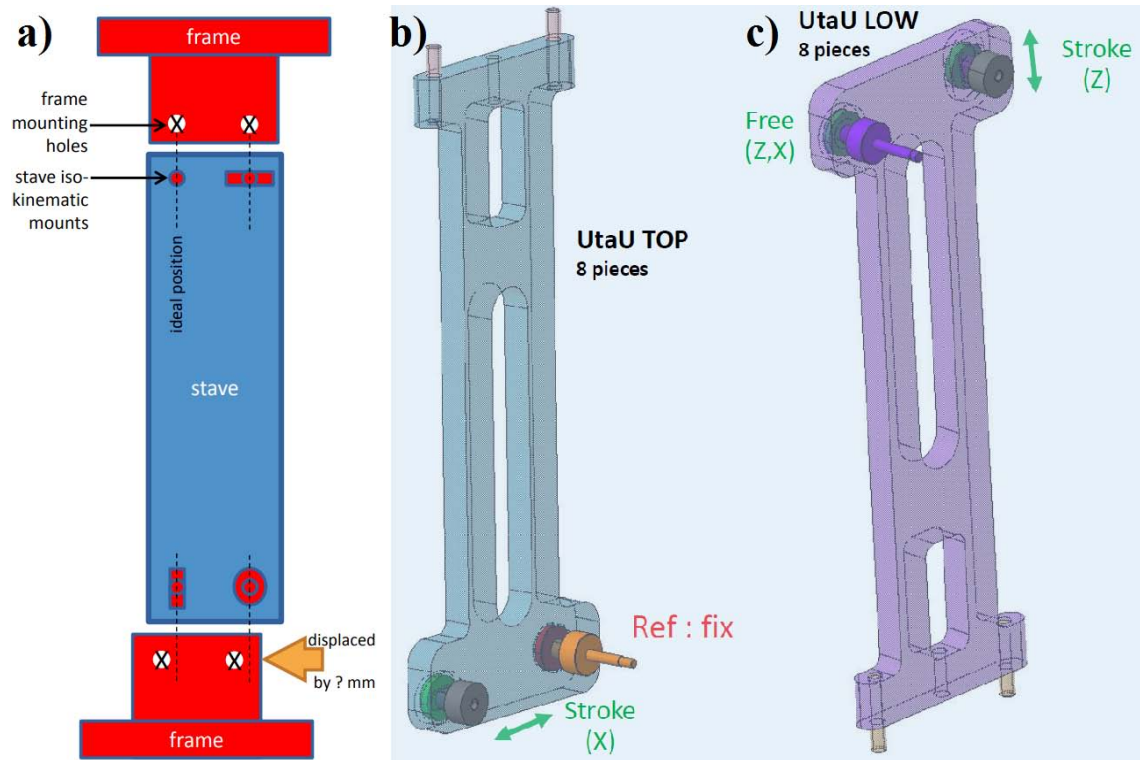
a) Iso-kinematic stave mounting system; b) UTaU layer top support (top 'frame'); c) UTaU layer bottom support (bottom 'frame') [26], [33]
